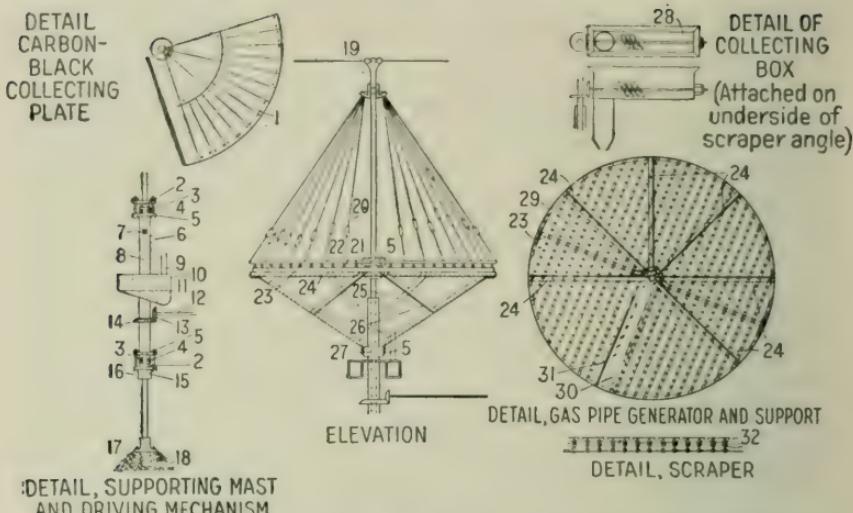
DETAILS OF THE PLATE OR CABOT PROCESS OF MAKING CARBON BLACK
